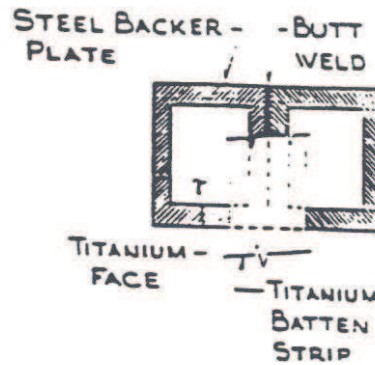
Typical titanium Resista-Clad Plate construction for new or total duct/vessel wall construction
